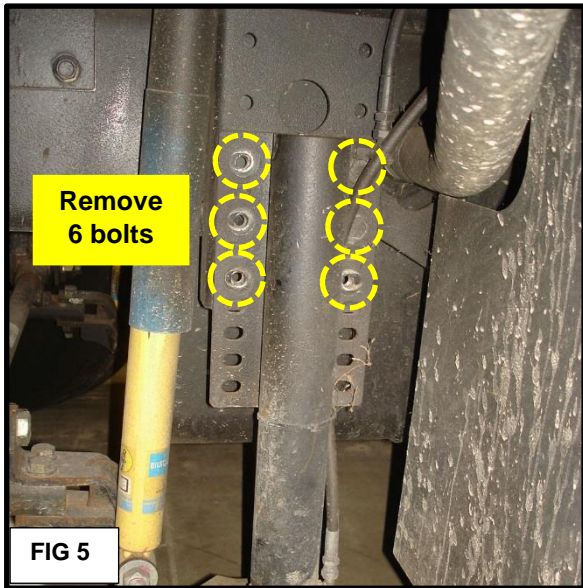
Remove 6 bolts holding the jack leg to the support plate.
